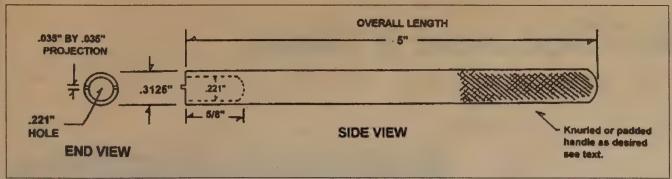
End and side mechanical views of the Slotted-Nut Tool used for 1/8" miniature panel phone jacks.
